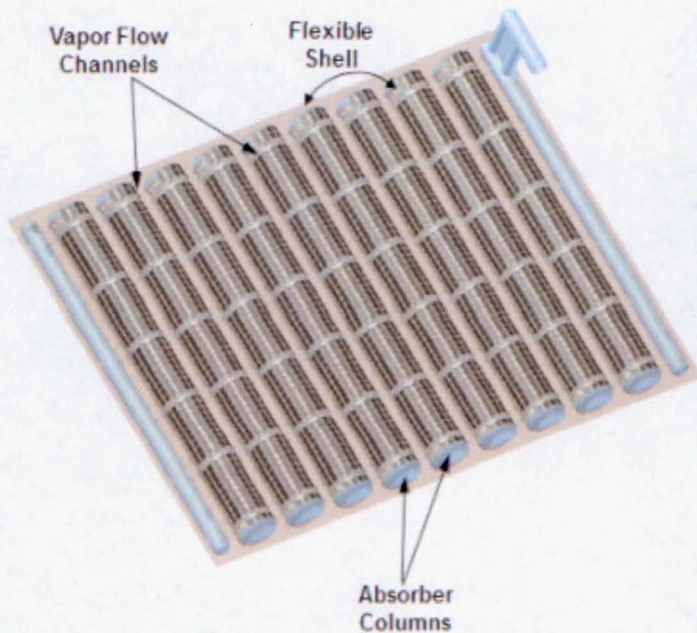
Overall Design Concept for the Absorber Radiator. Module Dimensions 12 in. × 17 in. × 1.1 in.
